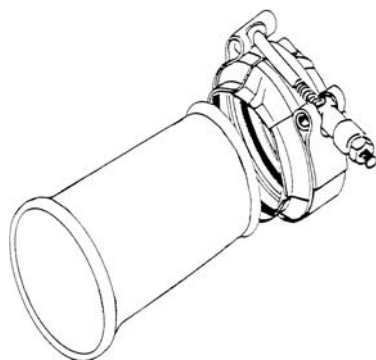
Joint with beaded pipe ends. (Adapted with permission of De Dietrich Process Systems, Mountainside, N.J.)
